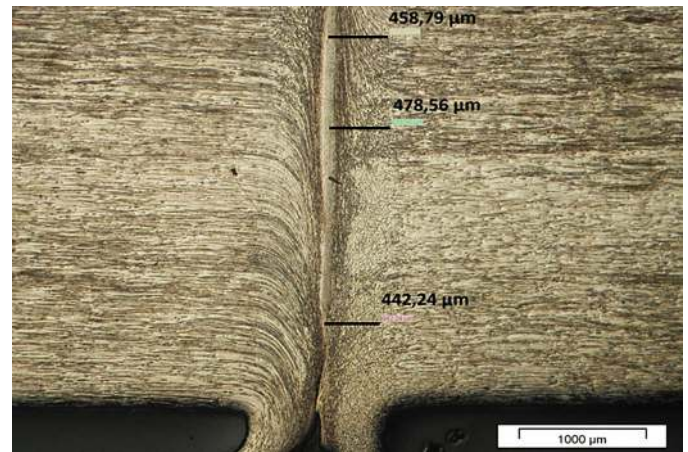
HAZ measurements in friction welded joint of 316L UFG steel, etched
